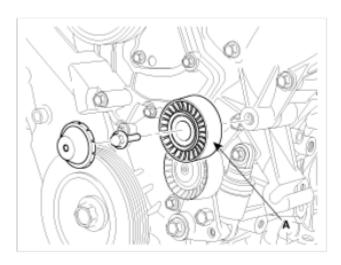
Identifying Drive Belt Idler With Mounting Bolt
